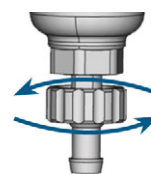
OPENING / CLOSING THE DISCHARGE SCREW OF THE COMPRESSED AIR REGULATOR
